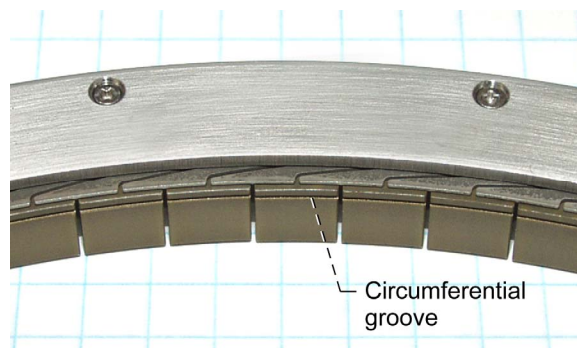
Pre-test photo of non-contacting finger seal inner diameter.
